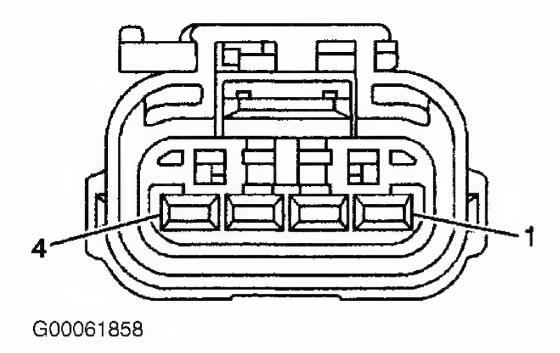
Identifying Fuel Sender Unit Connector Terminals (2.2L Engines) Courtesy of GENERAL MOTORS CORP.
